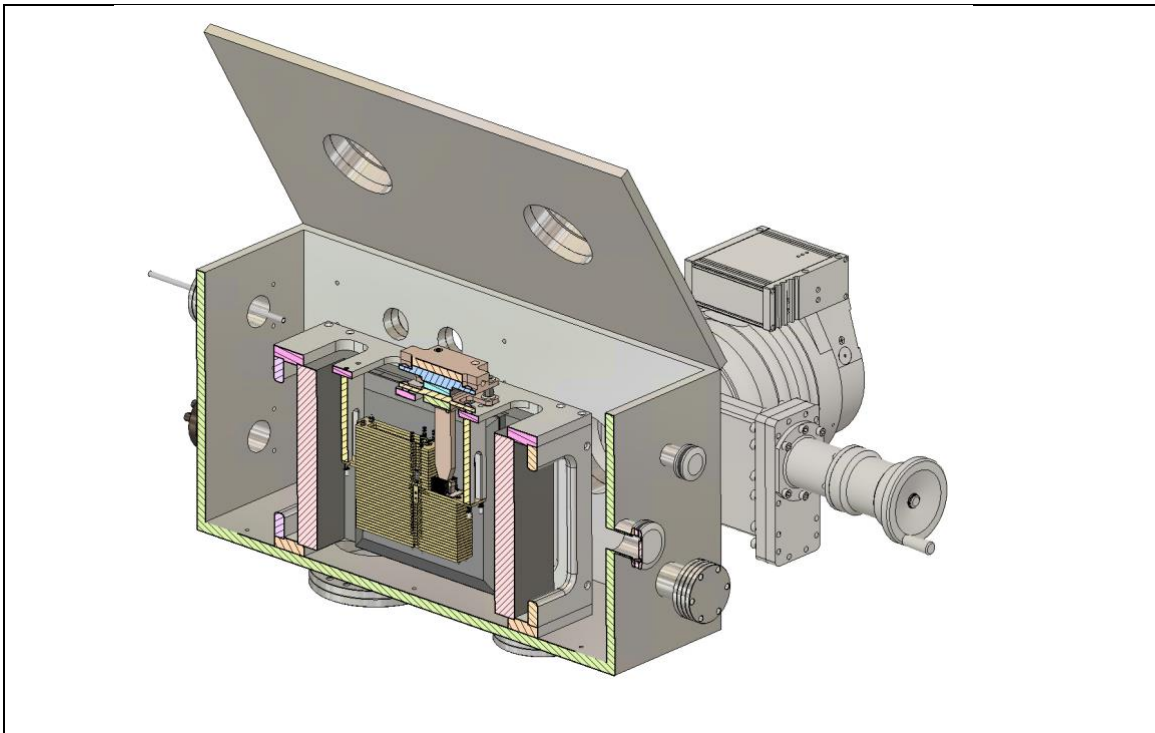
CAD model cross-section of the complete SR-CAMMS prototype.
